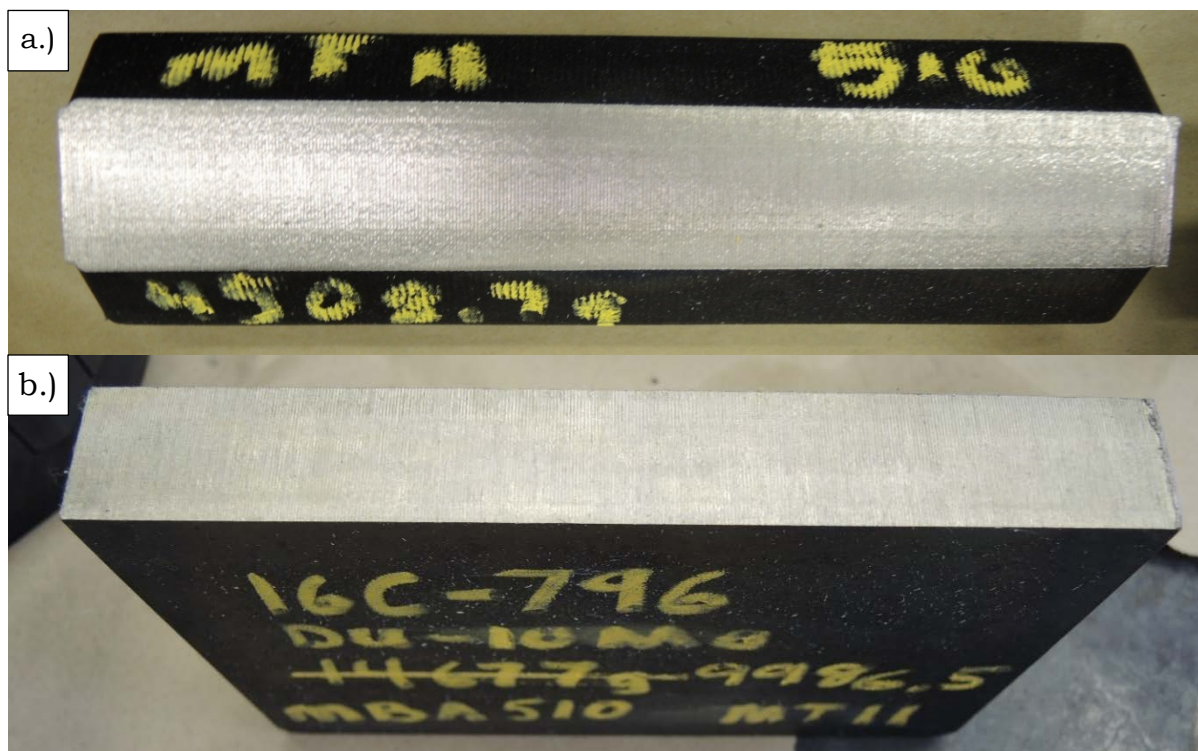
Cut surfaces after hot top removal. No voids were observed on the cut faces.
